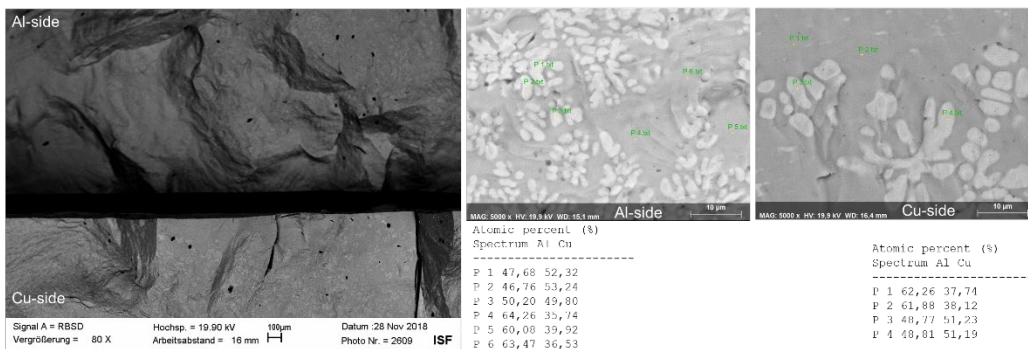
Fracture surfaces; scale= 100 μm (left); EDX measurements of fracture surfaces; scale= 10 μm (right)
